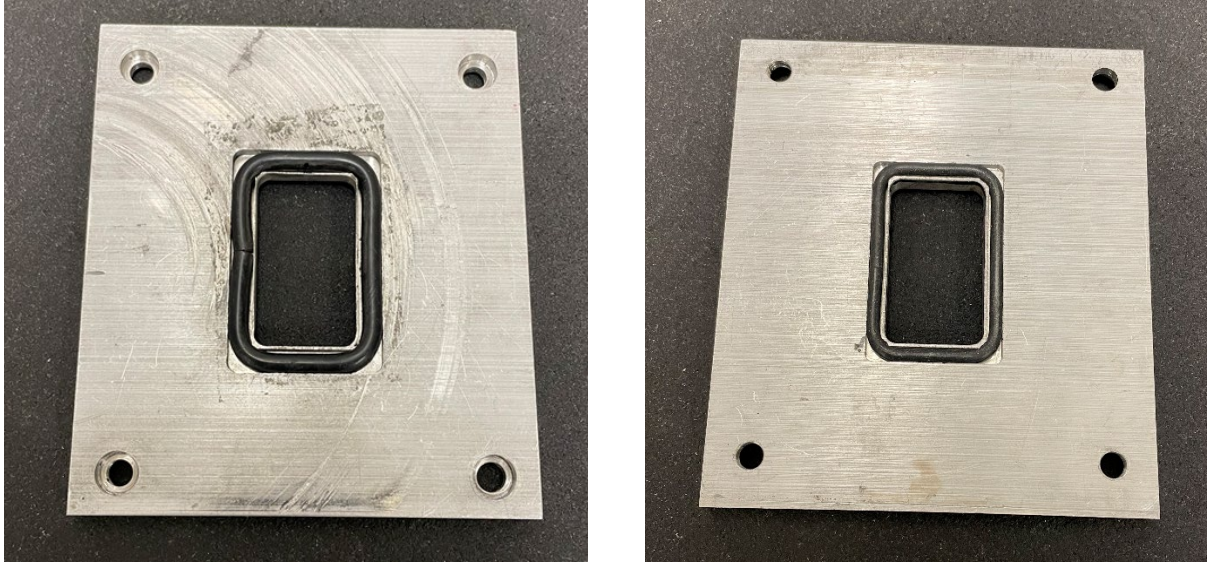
The O-ring seal plate used in stationary hot jet experiments viewed from the a.) front and b.) back.
